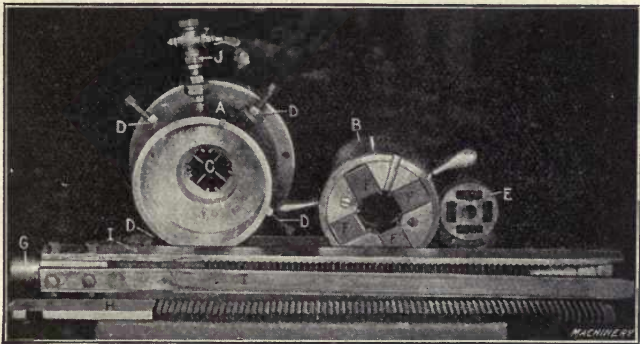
The Broaches and Broaching Fixture used for the Operation Illustrated in Fig. 25
